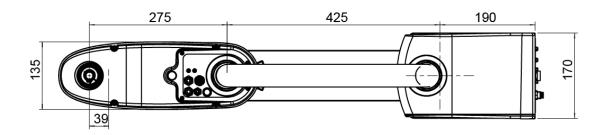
Dimensions of AH6 Robot with an arm length of 700 (Unit: mm)
